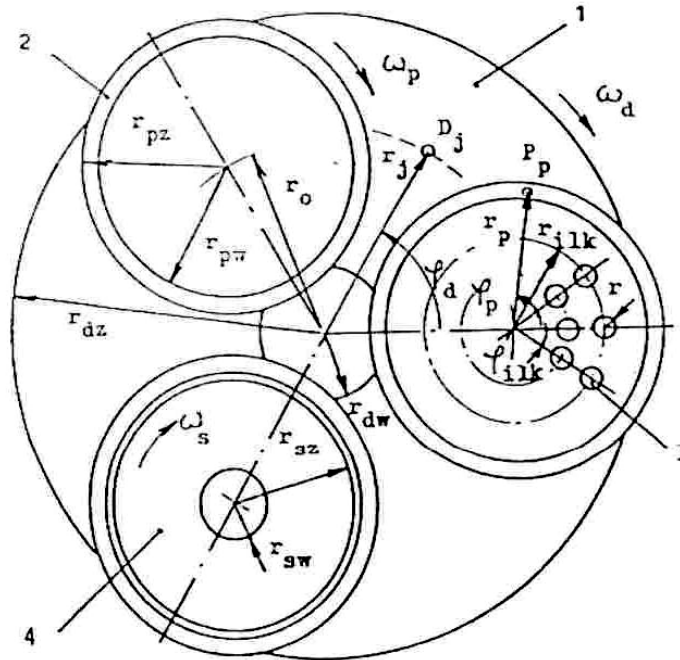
Standard kinematic system of single-disk lapping machine: 1 - lapping tool, 2 - conditioning ring, 4 - separator zone filled with workpieces 3
